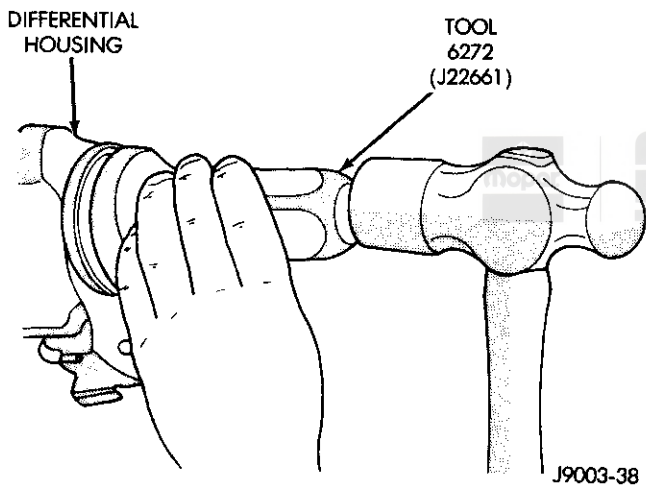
Drive Pinion Gear Shaft Seal Installation
